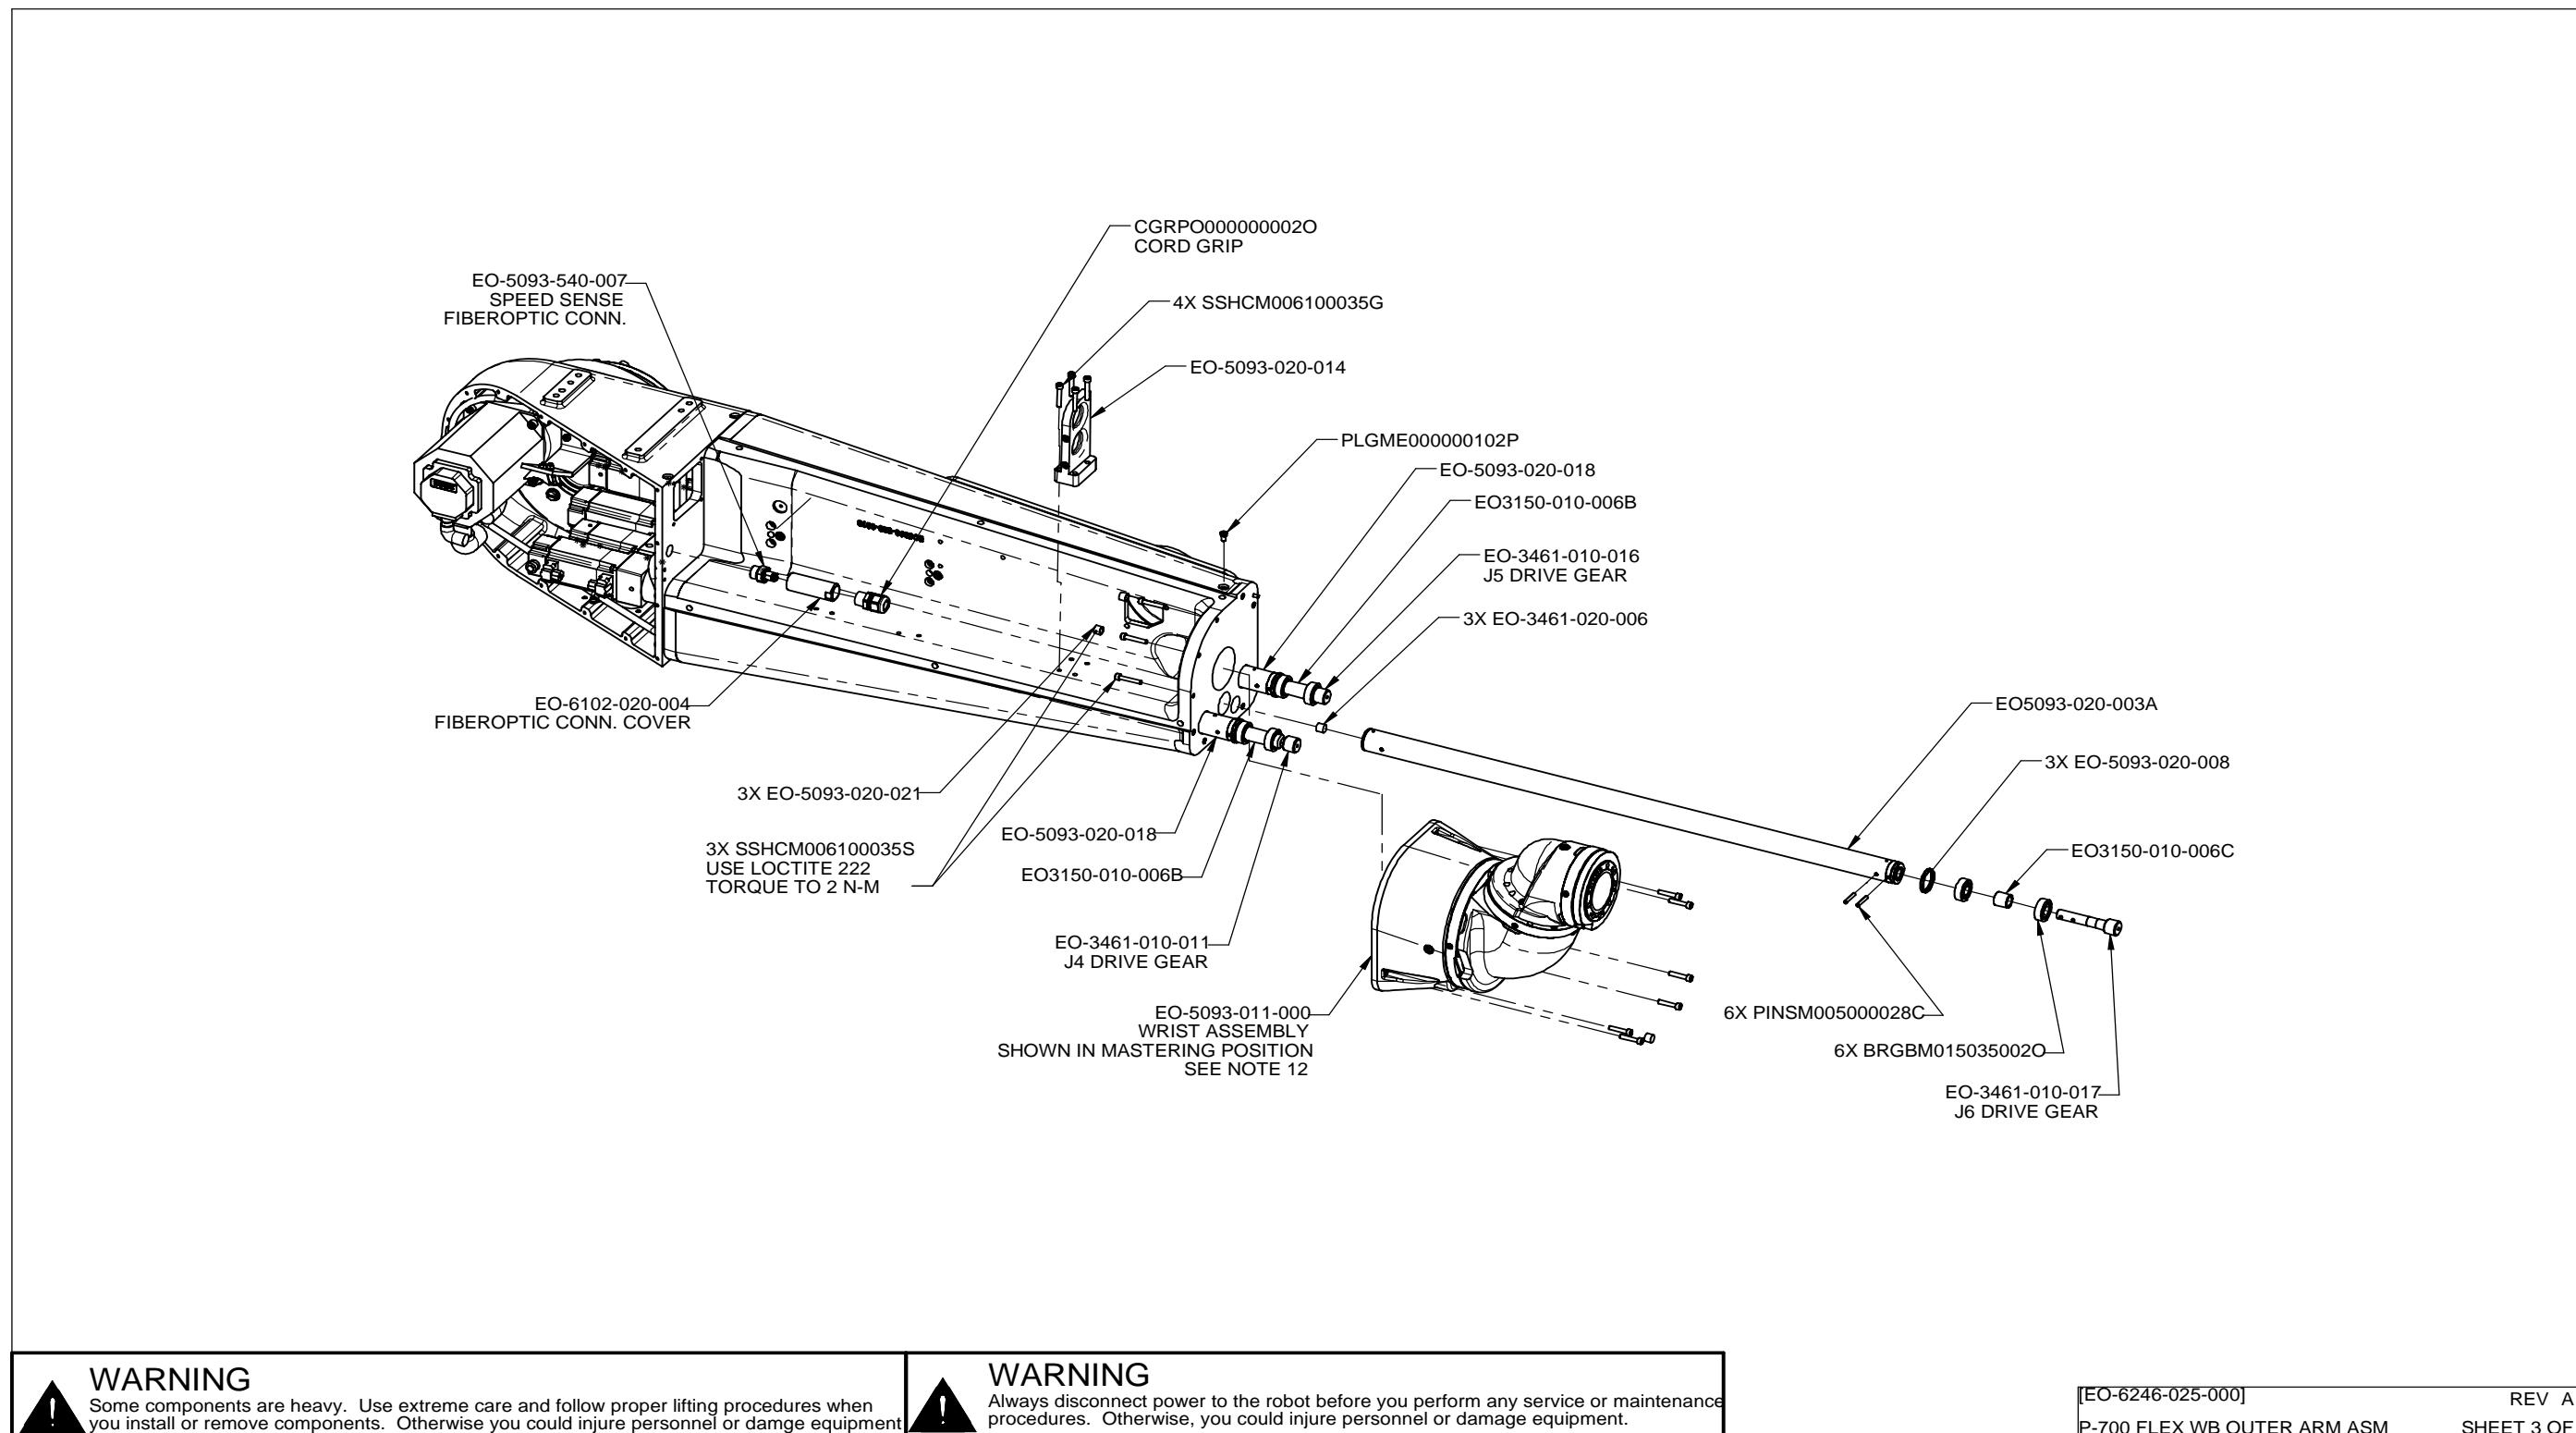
EO-6246-025-000 Sheet 3 of 4, P-700 FLEX WB OUTER ARM ASM
